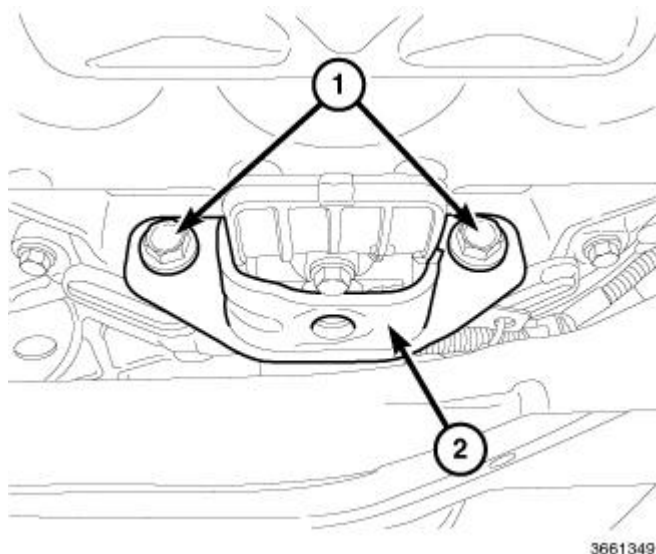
Lower Torque Strut Mounting Bracket & Bolts
